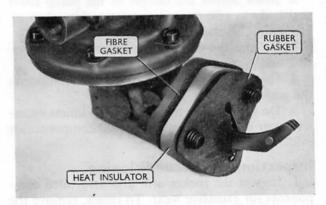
Fuel pump flange components. The edges of the rubber gasket slit must project away from the pump as shown
